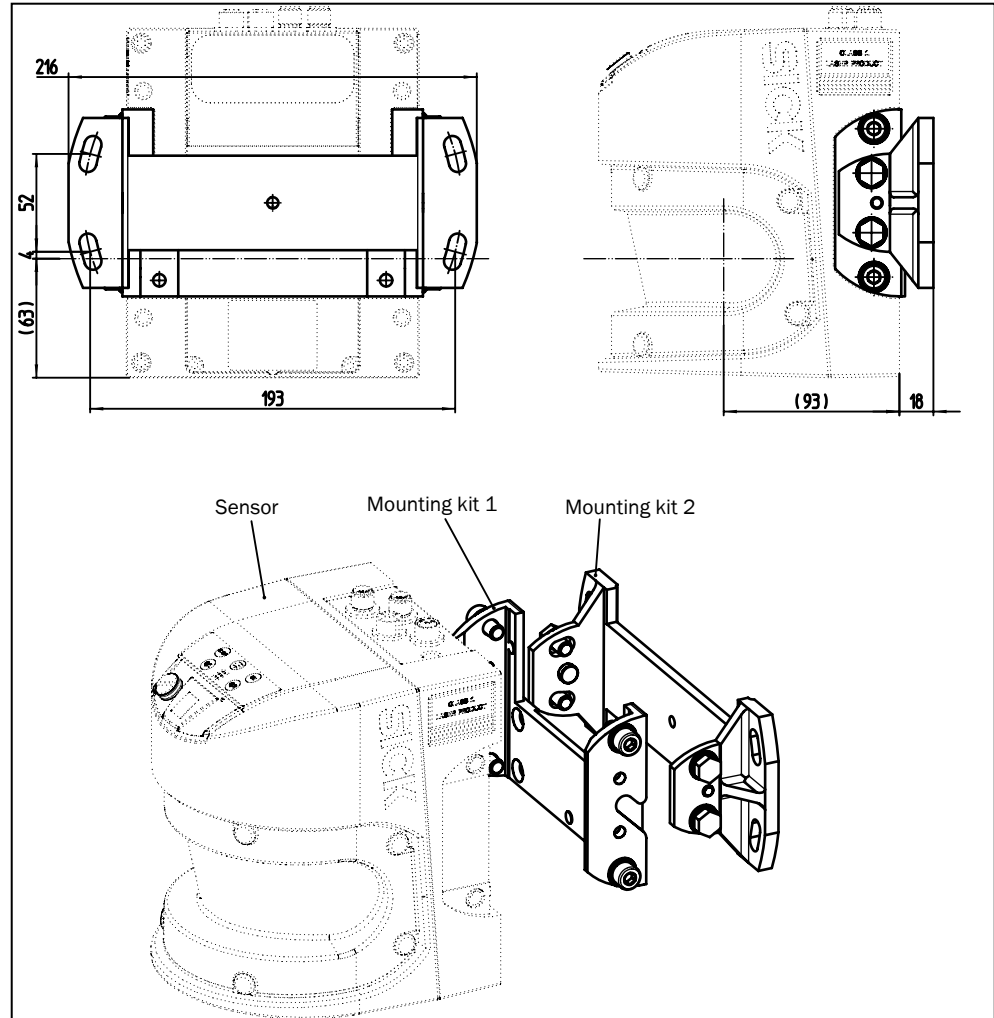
Dimensional drawing mounting kit 2 (mm)
